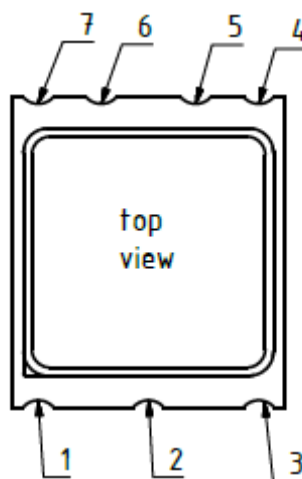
· OCXO I2C Footprint, Surface Mount, 25x22
